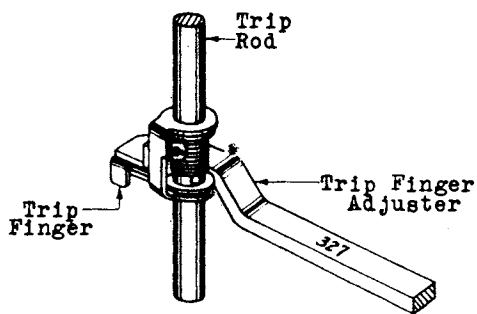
Method of Adjusting Clearance Between Bottom of Trip Finger Flange and Trip Lever
